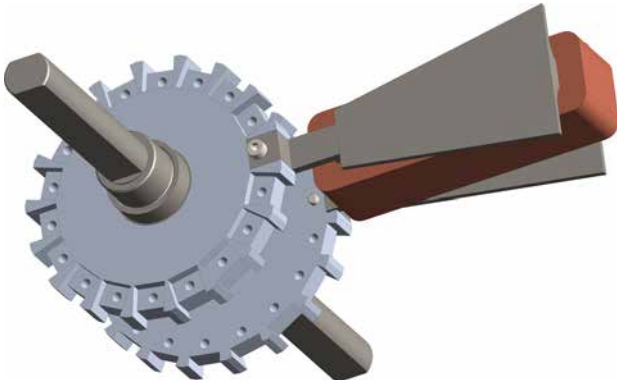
Assembly of the segmented stator tooth to spider of a SAT PMBLDC motor.
